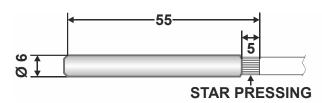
Dimensions of the cable-type bulb sensor in mm
